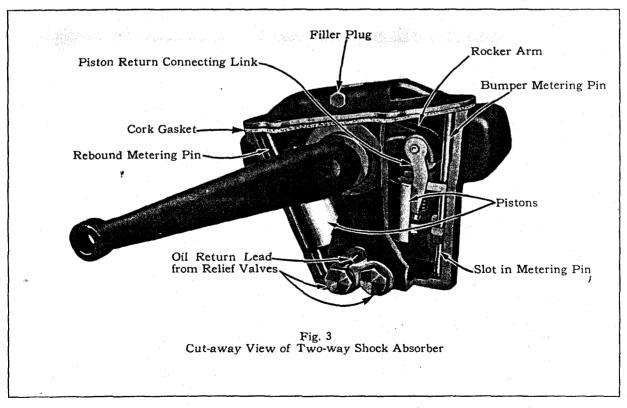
Shock Absorbers Cadillac 353—La Salle 340
